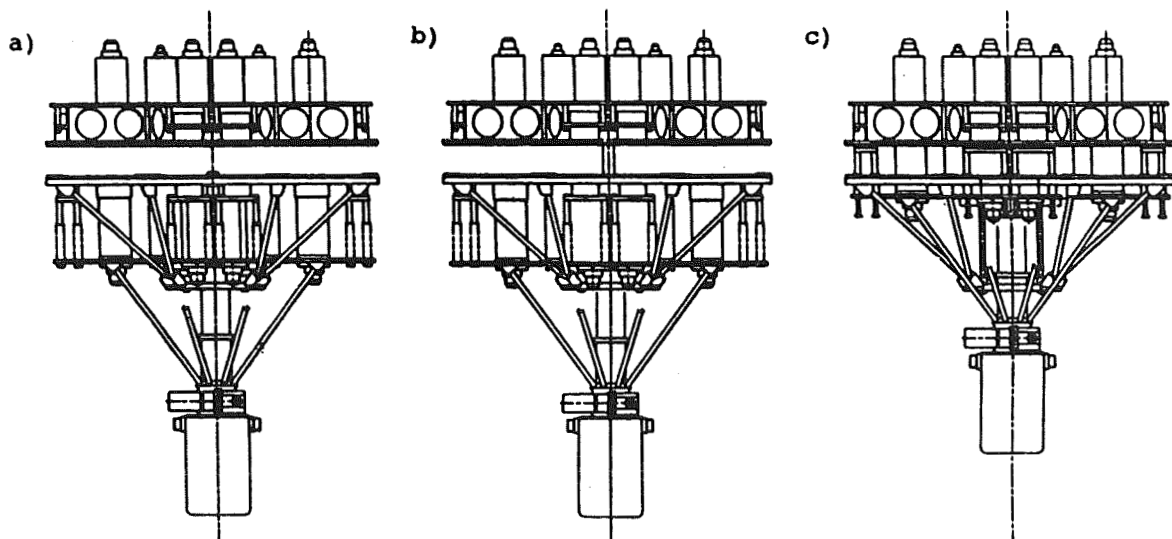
a) Disengaged, b) Actuator Extended, c) Engaged.
